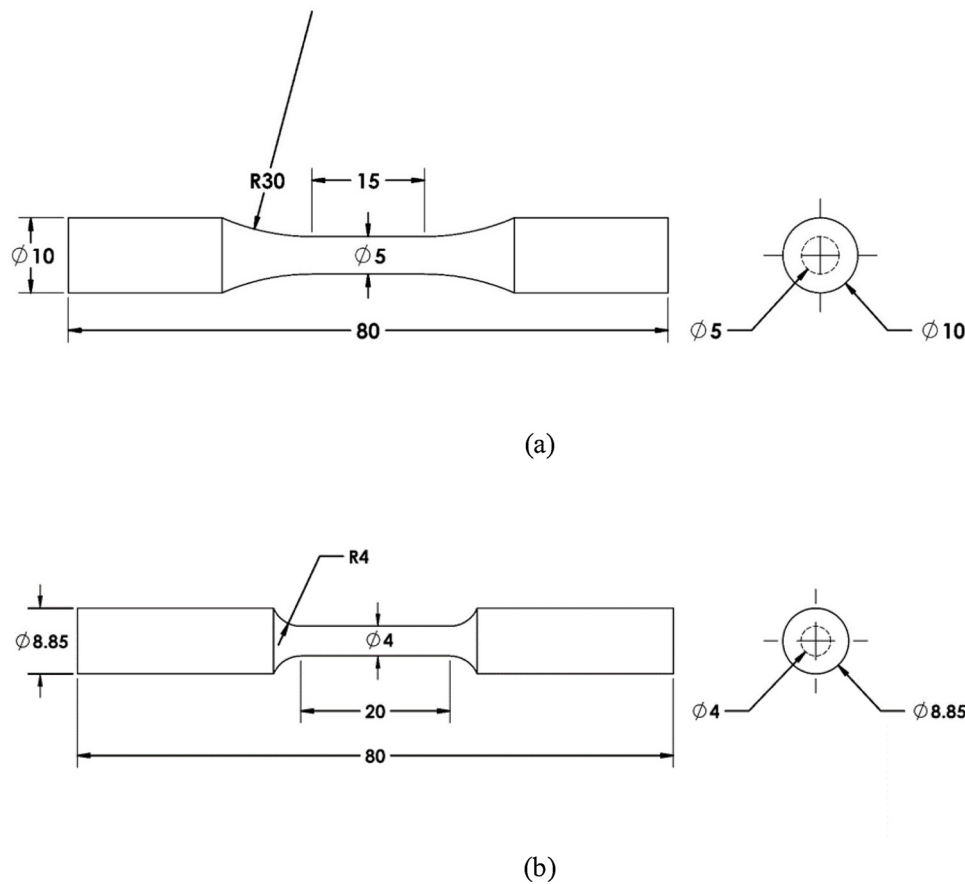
(a) Round specimens with a uniform gage section for strain-controlled fatigue testing according to ASTM E606 [27], and (b) round tension test specimens for tensile testing according to ASTM E8 [28] (all dimensions are in mm).
